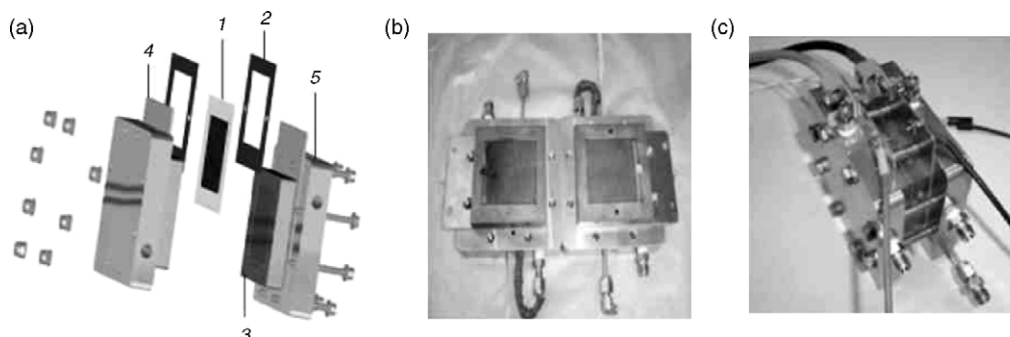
(a) Schematic representation, of the single fuel cell assembling: (1) MEA, (2) gaskets, (3) bipolar plates, (4) current collectors and (5) end plates. (b) Photograph of the disassembled  $25 \text{ cm}^2$  surface area single fuel cell. (c) Photograph of the assembled  $25 \text{ cm}^2$  surface area single fuel cell.
